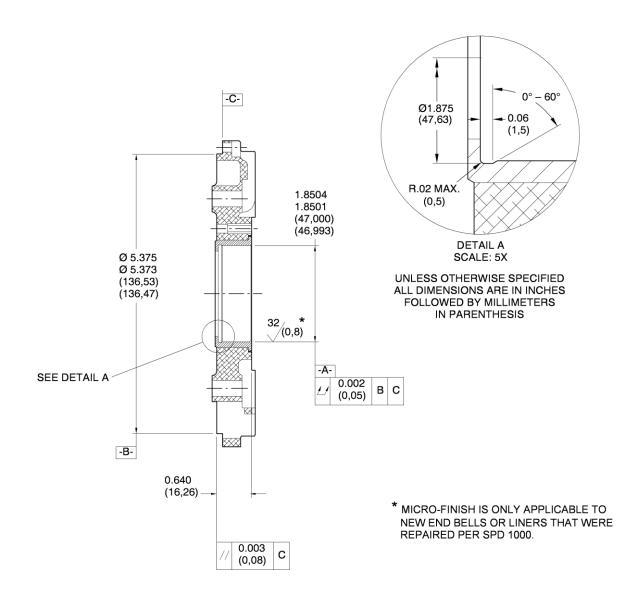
Anti-Drive End End Bell Bearing Liner Machining Specifications
